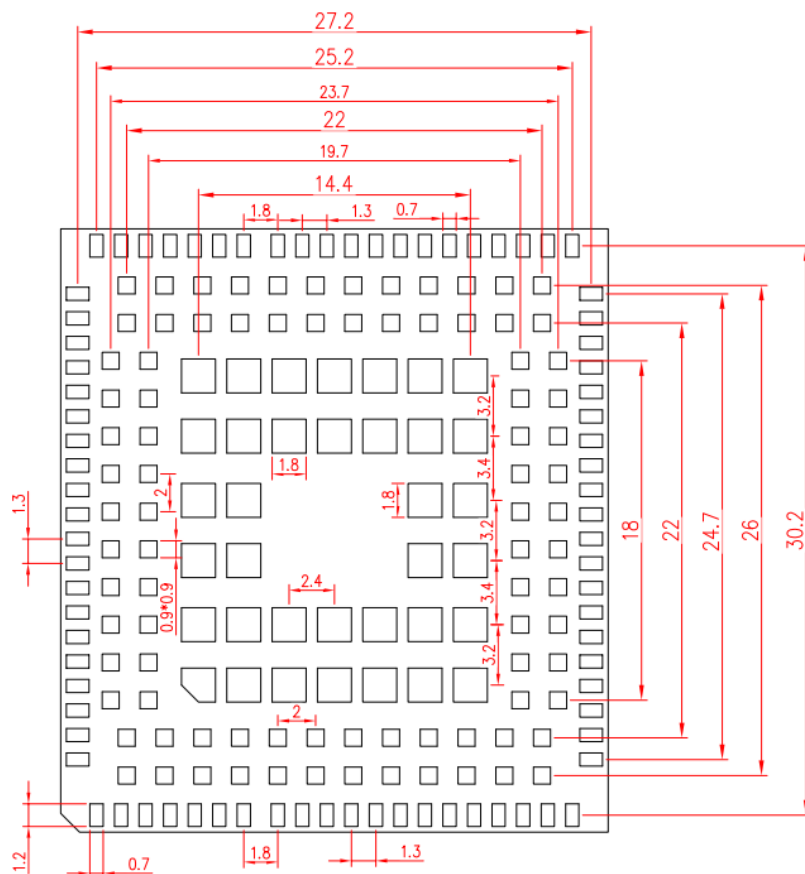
Recommended PCB pad design for FG132&FG332 module (unit: mm)
